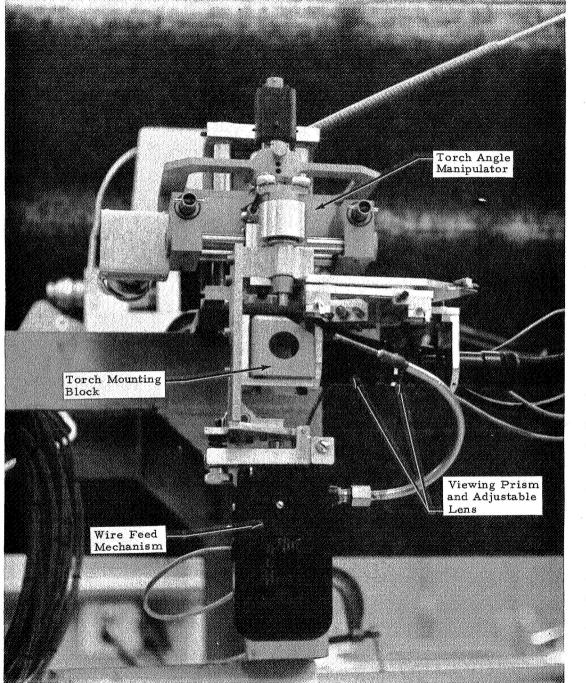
CCTV Arc Guidance Adapter Kit Assembly
